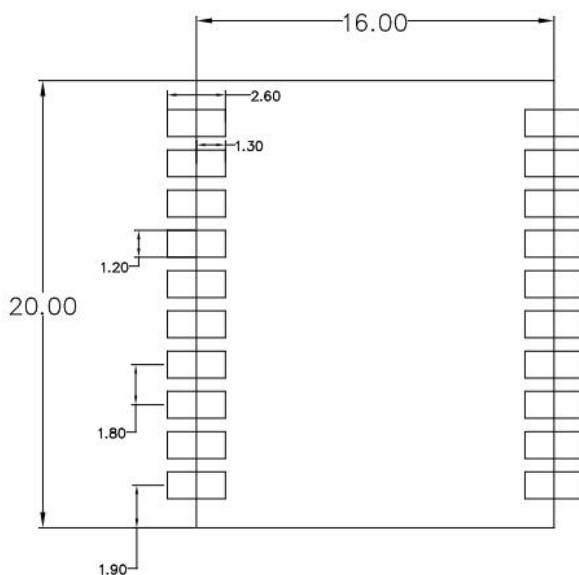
Recommended PCB Footprint Dimensions (Unit: mm)
